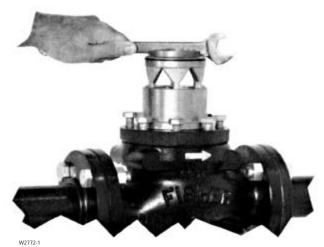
Seat Ring/Cage Removal or Installation Using Body as Holding Fixture
